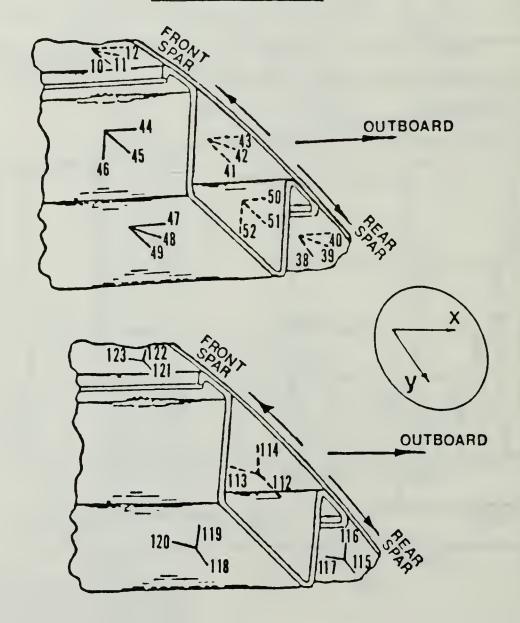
A P2V Starboard Wing, Strain Gage Locations, Top of Test Section, Interior
